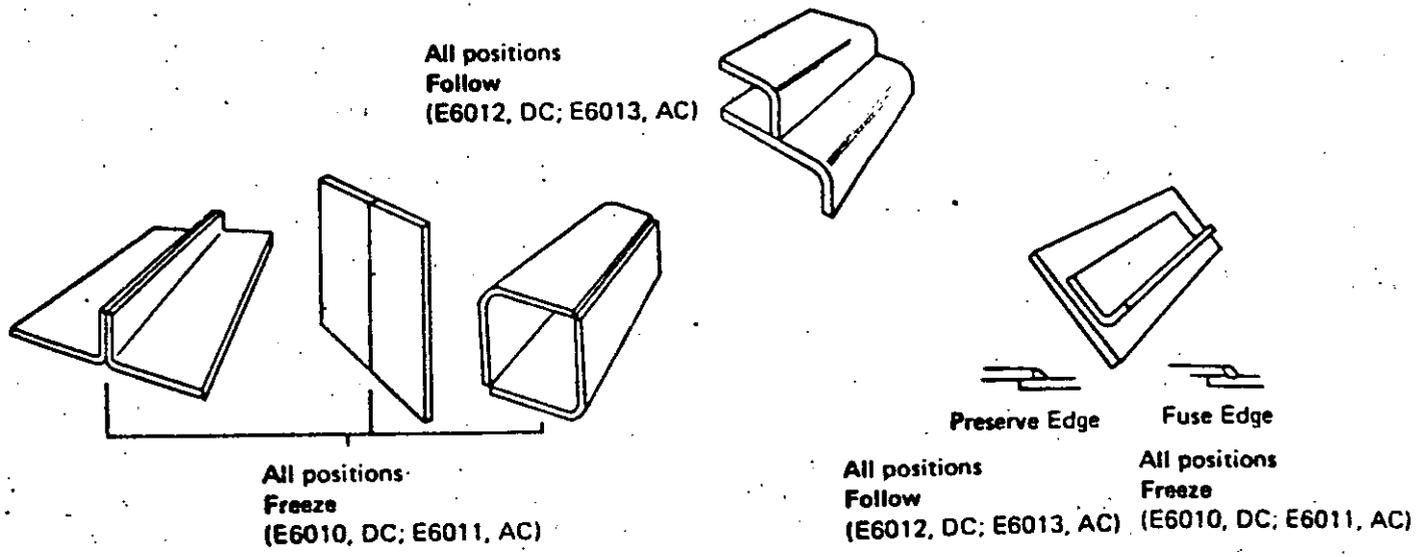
Guide to selection of electrodes for sheet-metal welds.
